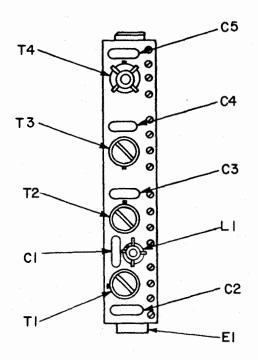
22 MHz Subassembly A2A4A12, Component Locations
